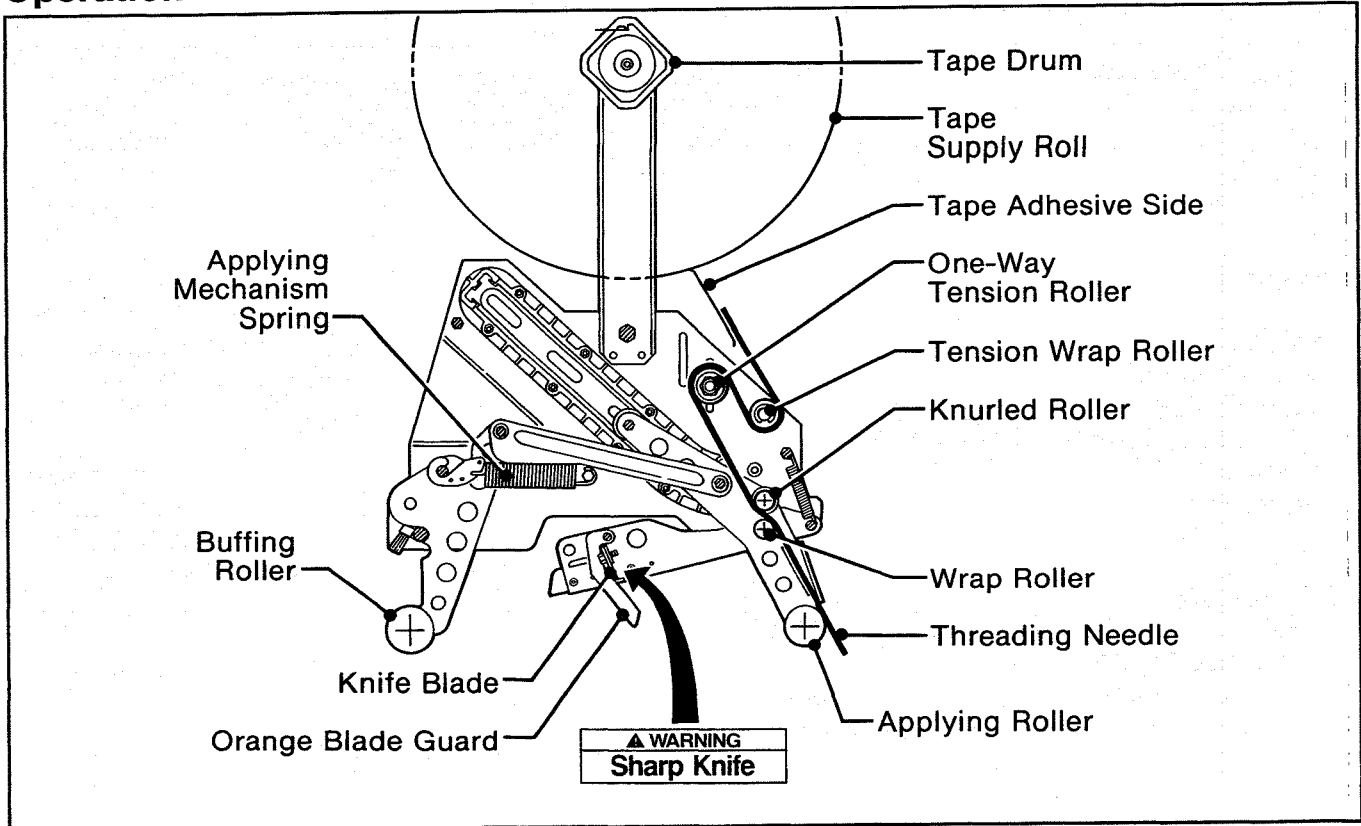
Taping Head Components/Threading Diagram, Upper Head (Left Side View)
